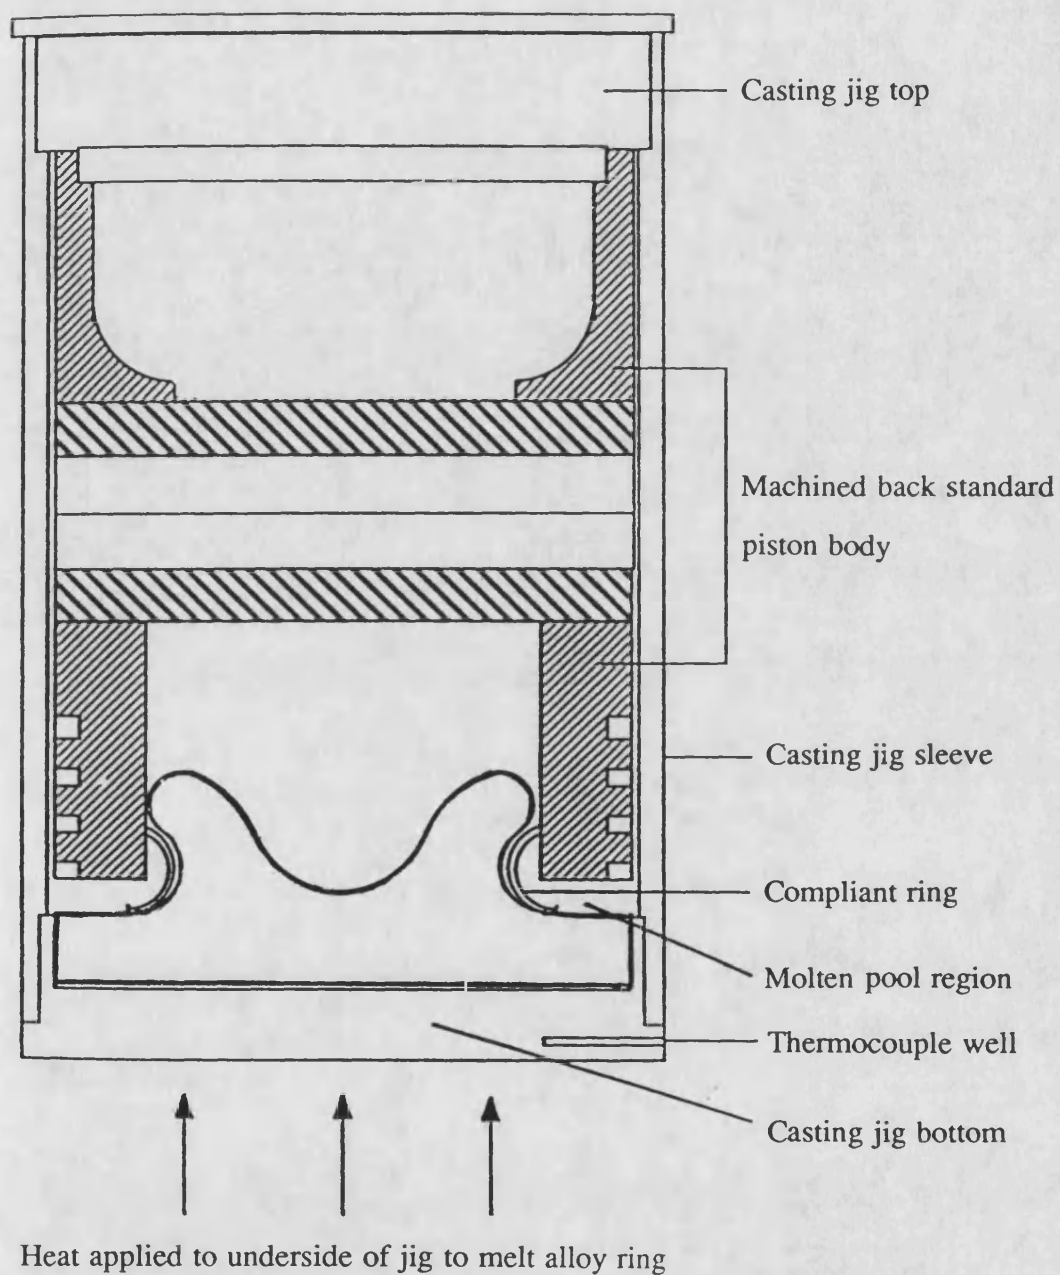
Jig used to cast formed Ceramic caps into machined piston bodies.
